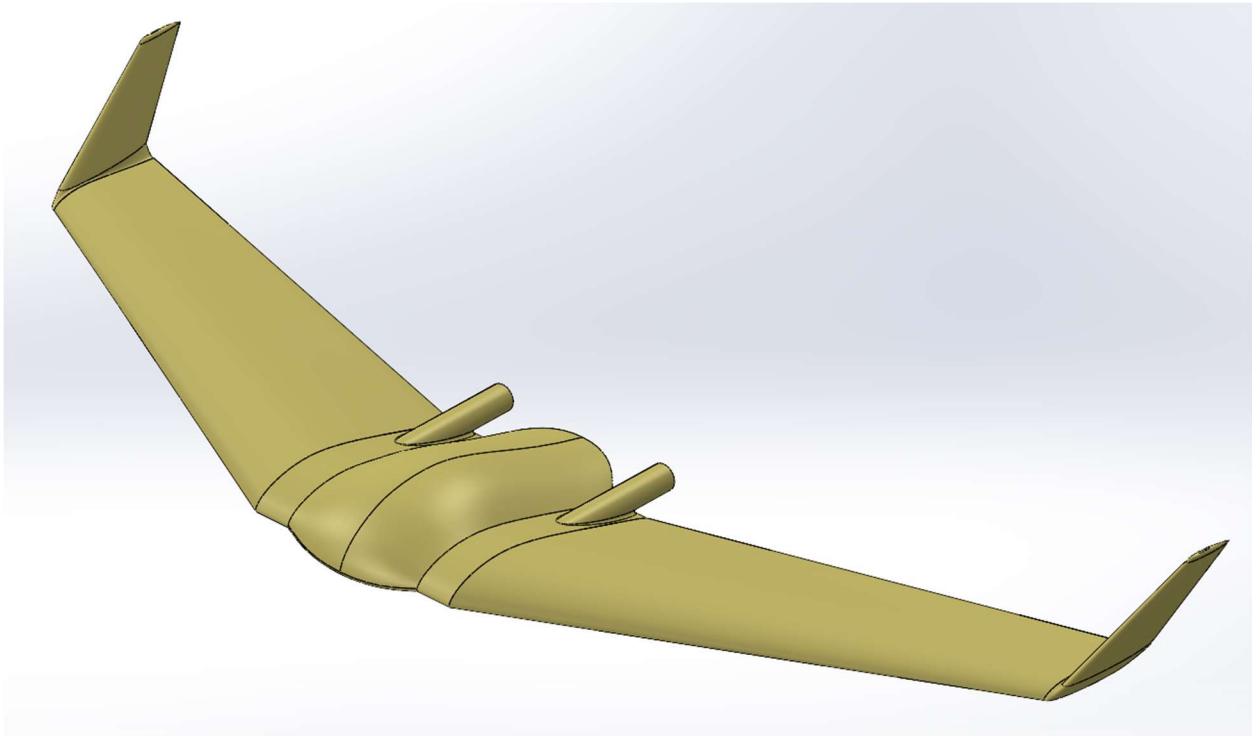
Complete Aircraft Model with Winglets and Motor Mounts.
